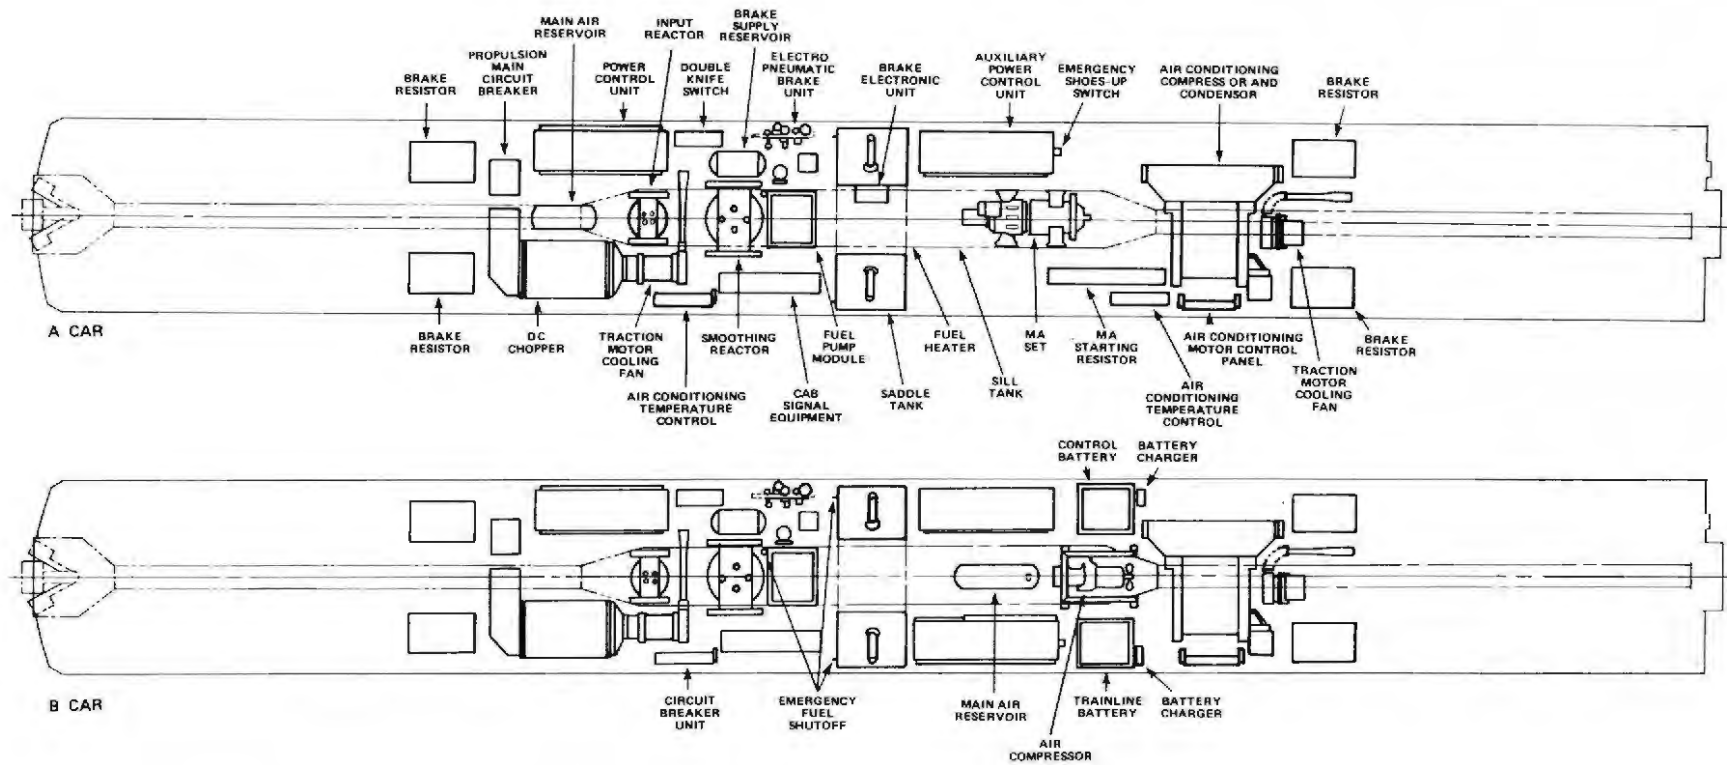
Garrett GT/E Underfloor Equipment Arrangement
